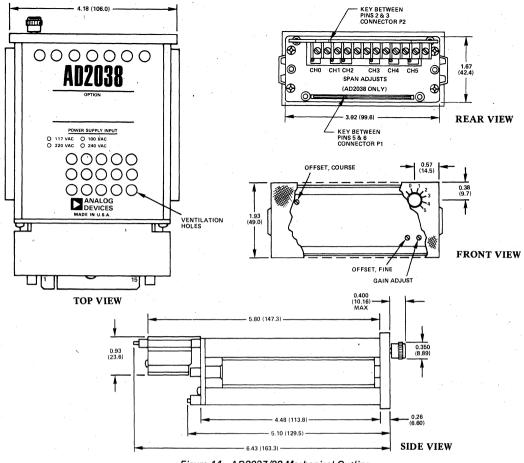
AD2037/38 Mechanical Outline (Dimensions shown in inches and (mm))
